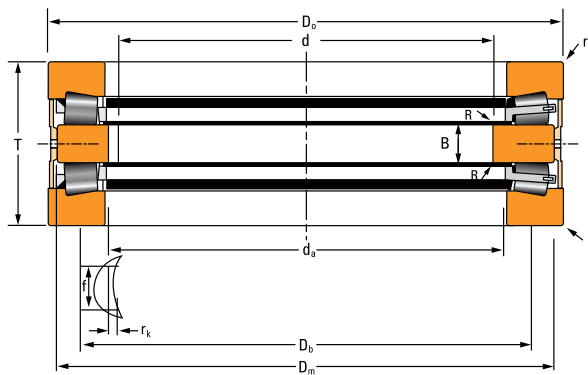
Type TTDFLK double-row thrust tapered roller bearing assembly.
